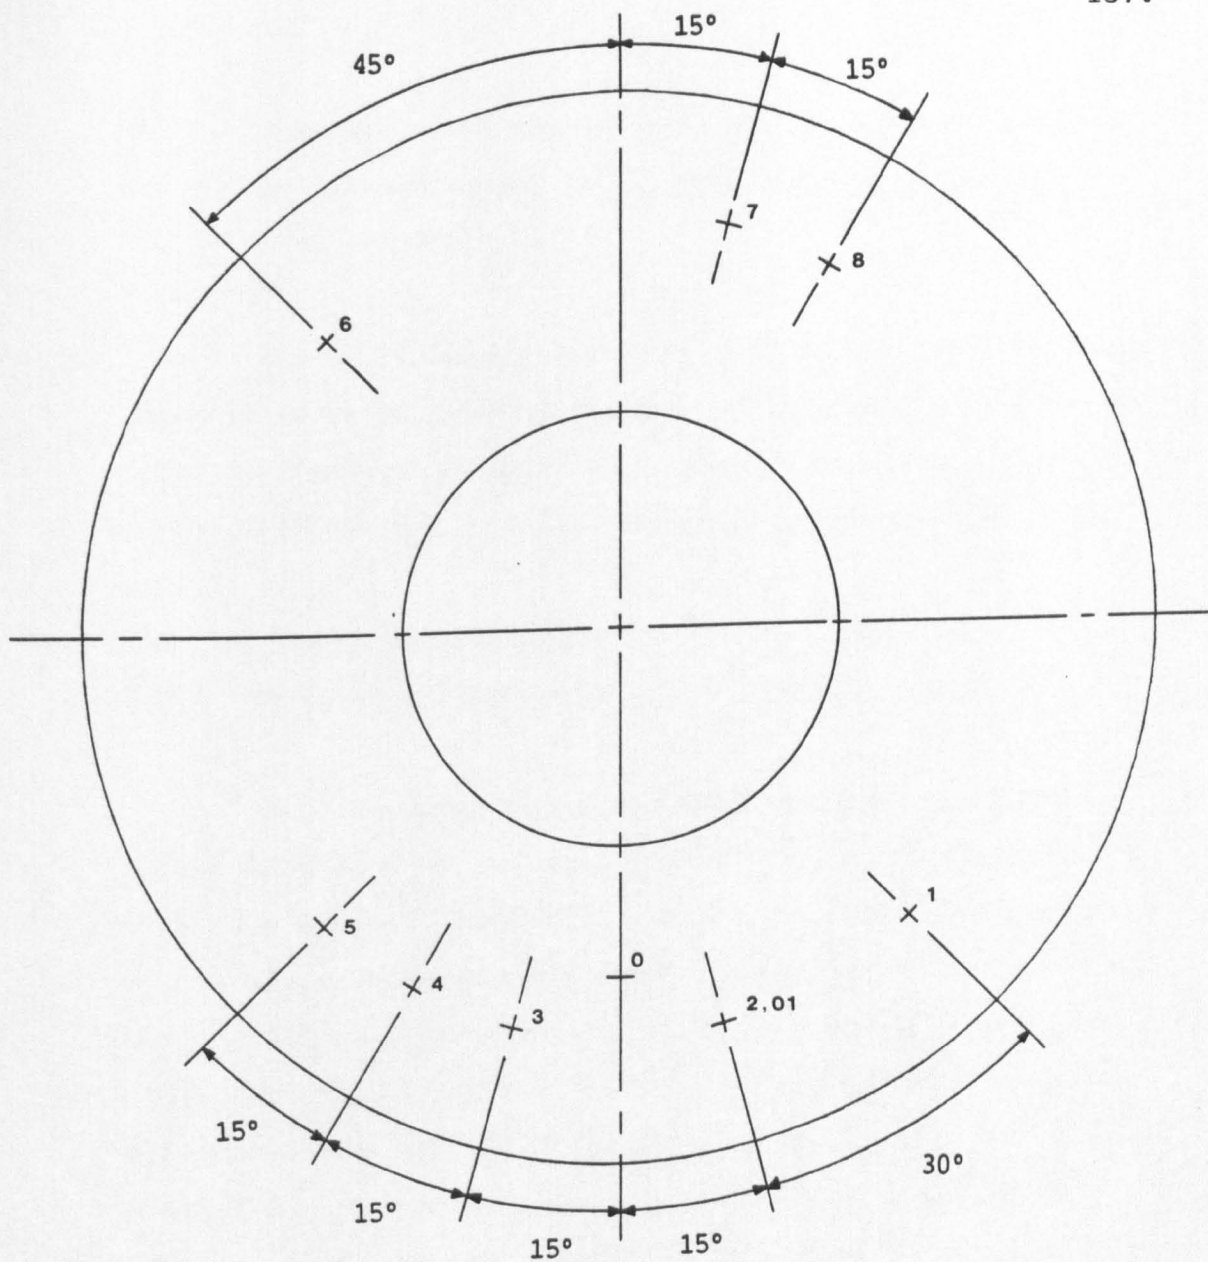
Angular Positions Of The Thermocouples In The Bearing Housing
